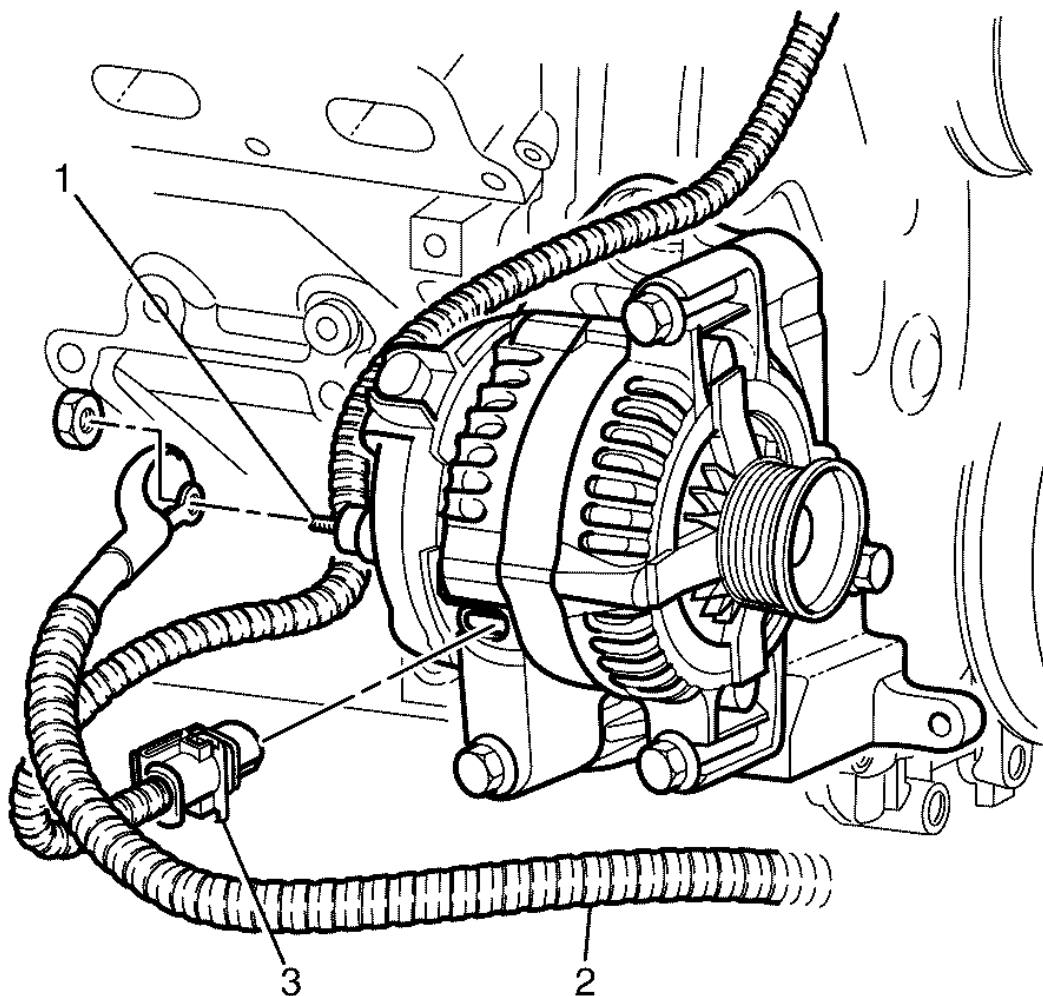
Identifying Alternator Terminal Nut & Electrical Connector
